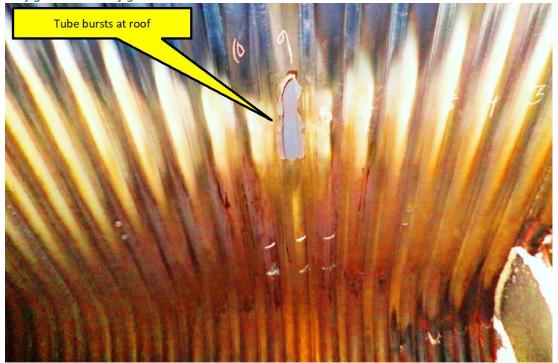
The above photo shows the eroded roof panel & the burst roof tube. The arrangement of wingwall SH / Evaporator had allowed preferential gas flow as shown in figure 3.
